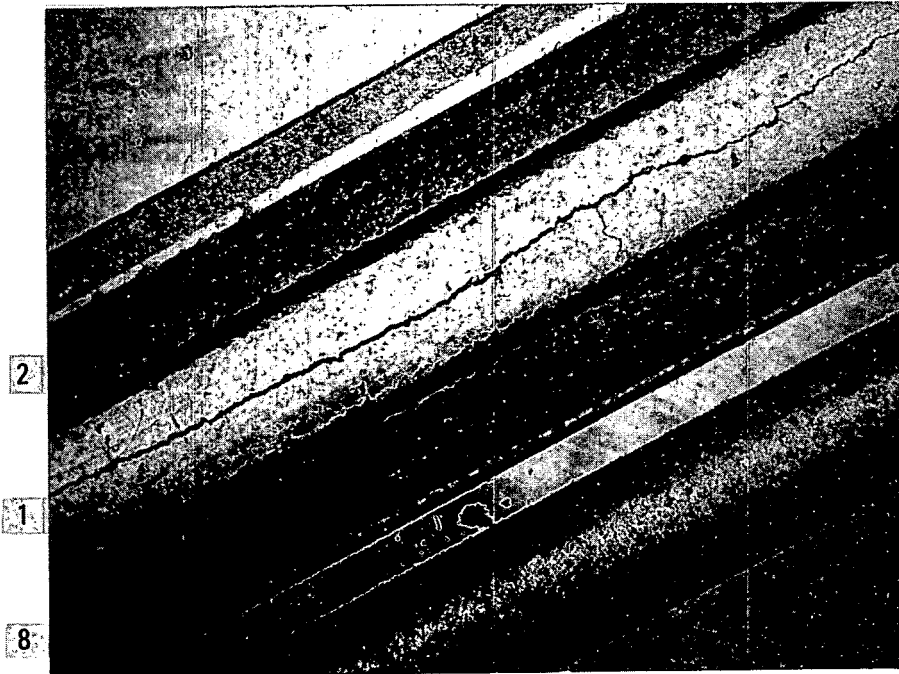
Internal cracks in fuel body 2 of FTE-2. Crack in hole 1 (center face) is clearly evident, while cracks in holes 2 and 8 are somewhat obscure.
